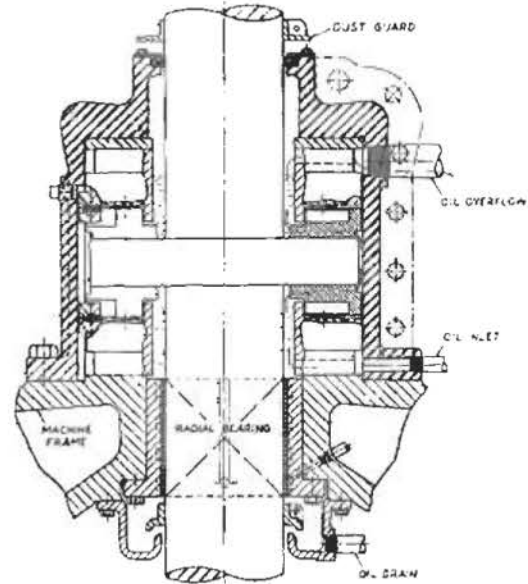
Simple vertical mounting for Style NN, JJ or BB double thrust bearing. Collar is integral with shaft. Forced lubrication is used. See also Figure 44.
